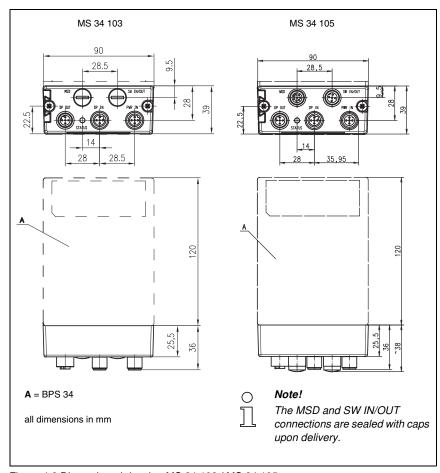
Dimensioned drawing MS 34 103 / MS 34 105
